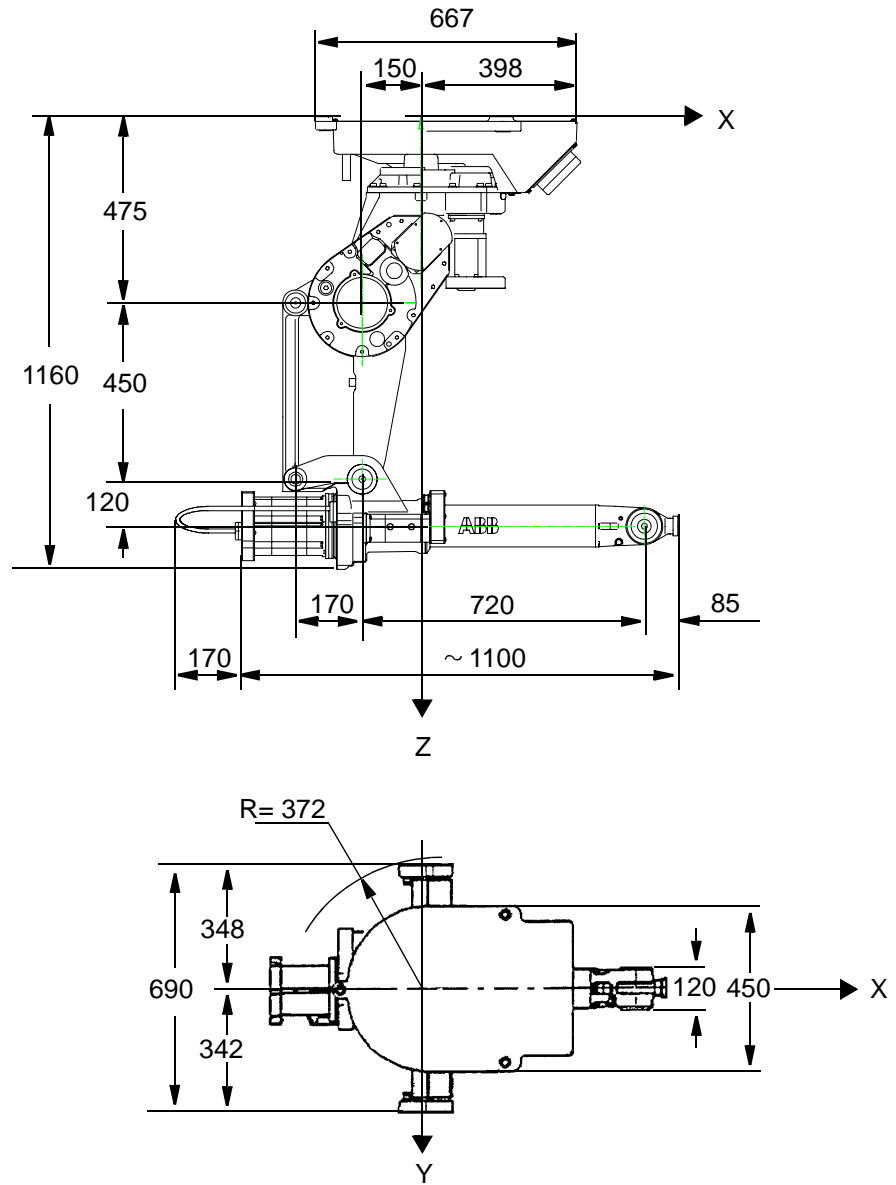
View of the manipulator (inverted mounted version) from the side and above (dimensions in mm).
